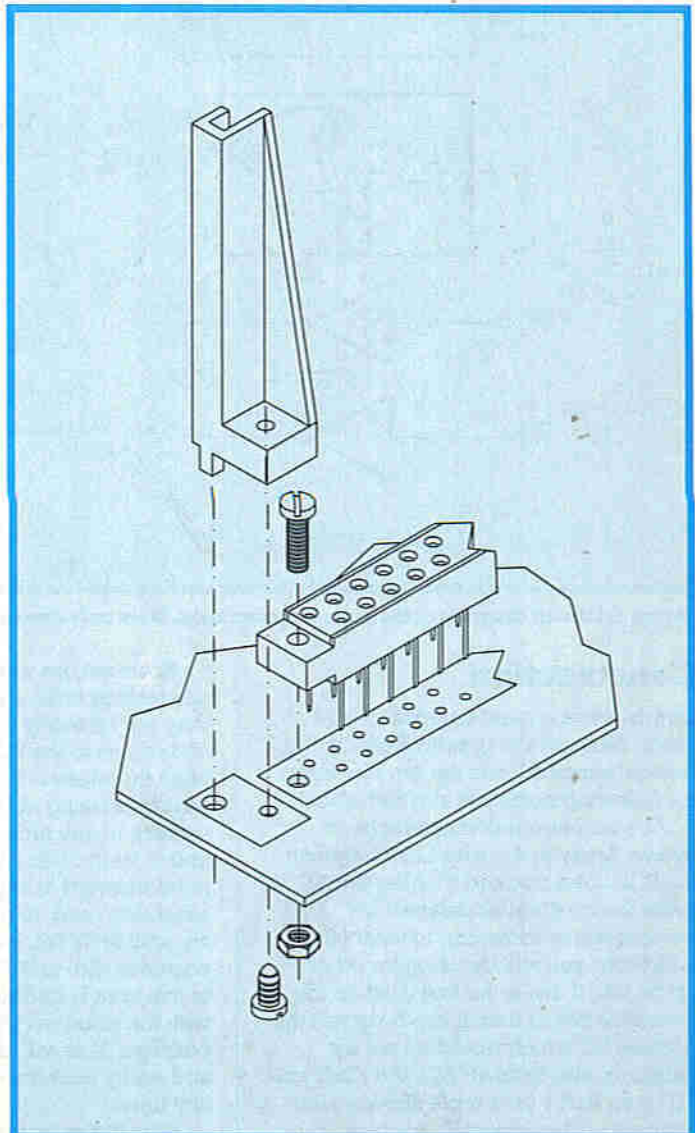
Mounting the motherboard PCB socket and card PCB guides.
